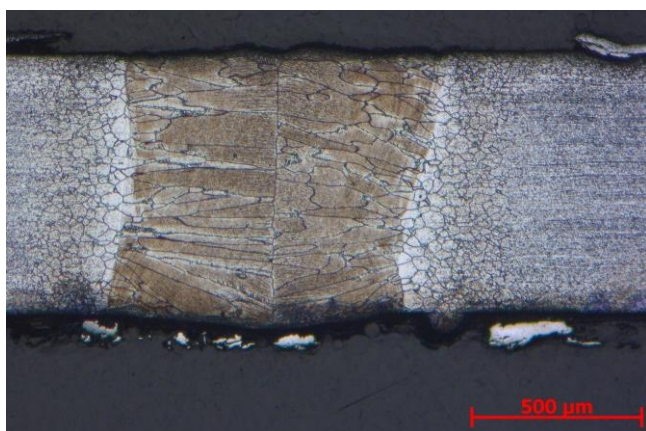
Macrostructure of laser-beam welded AISI 430
